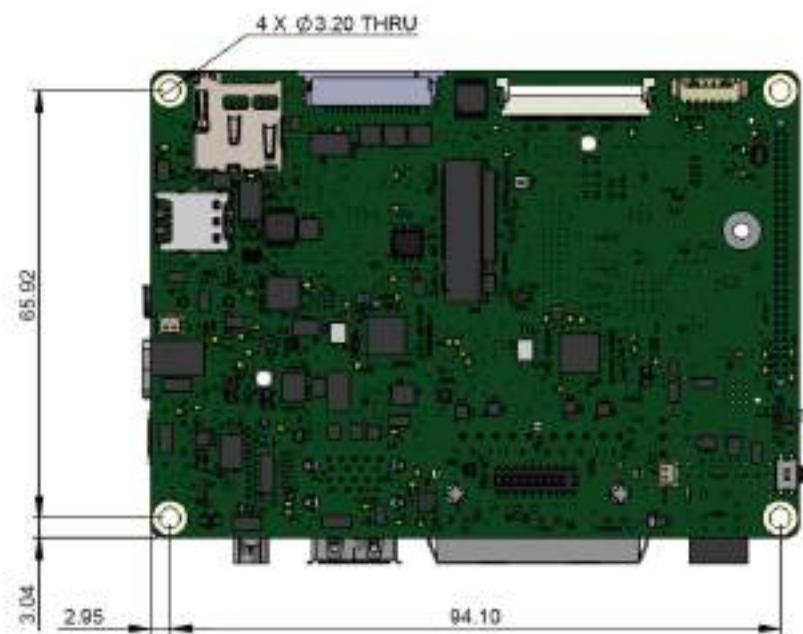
i.MX 8M Plus Pico ITX SBC Mechanical Dimensions Bottom View
